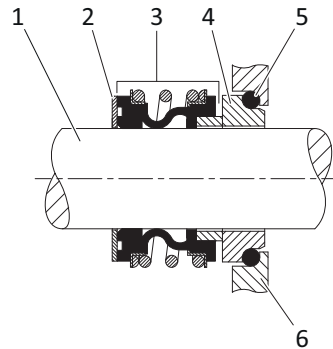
Design of mechanical seal with elastomer bellows and O-ring
